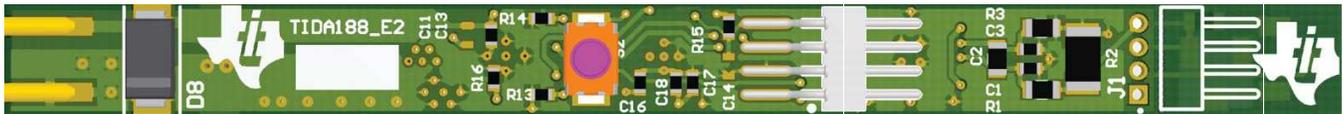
View of the IO-Link Transmitter Design (Bottom)
